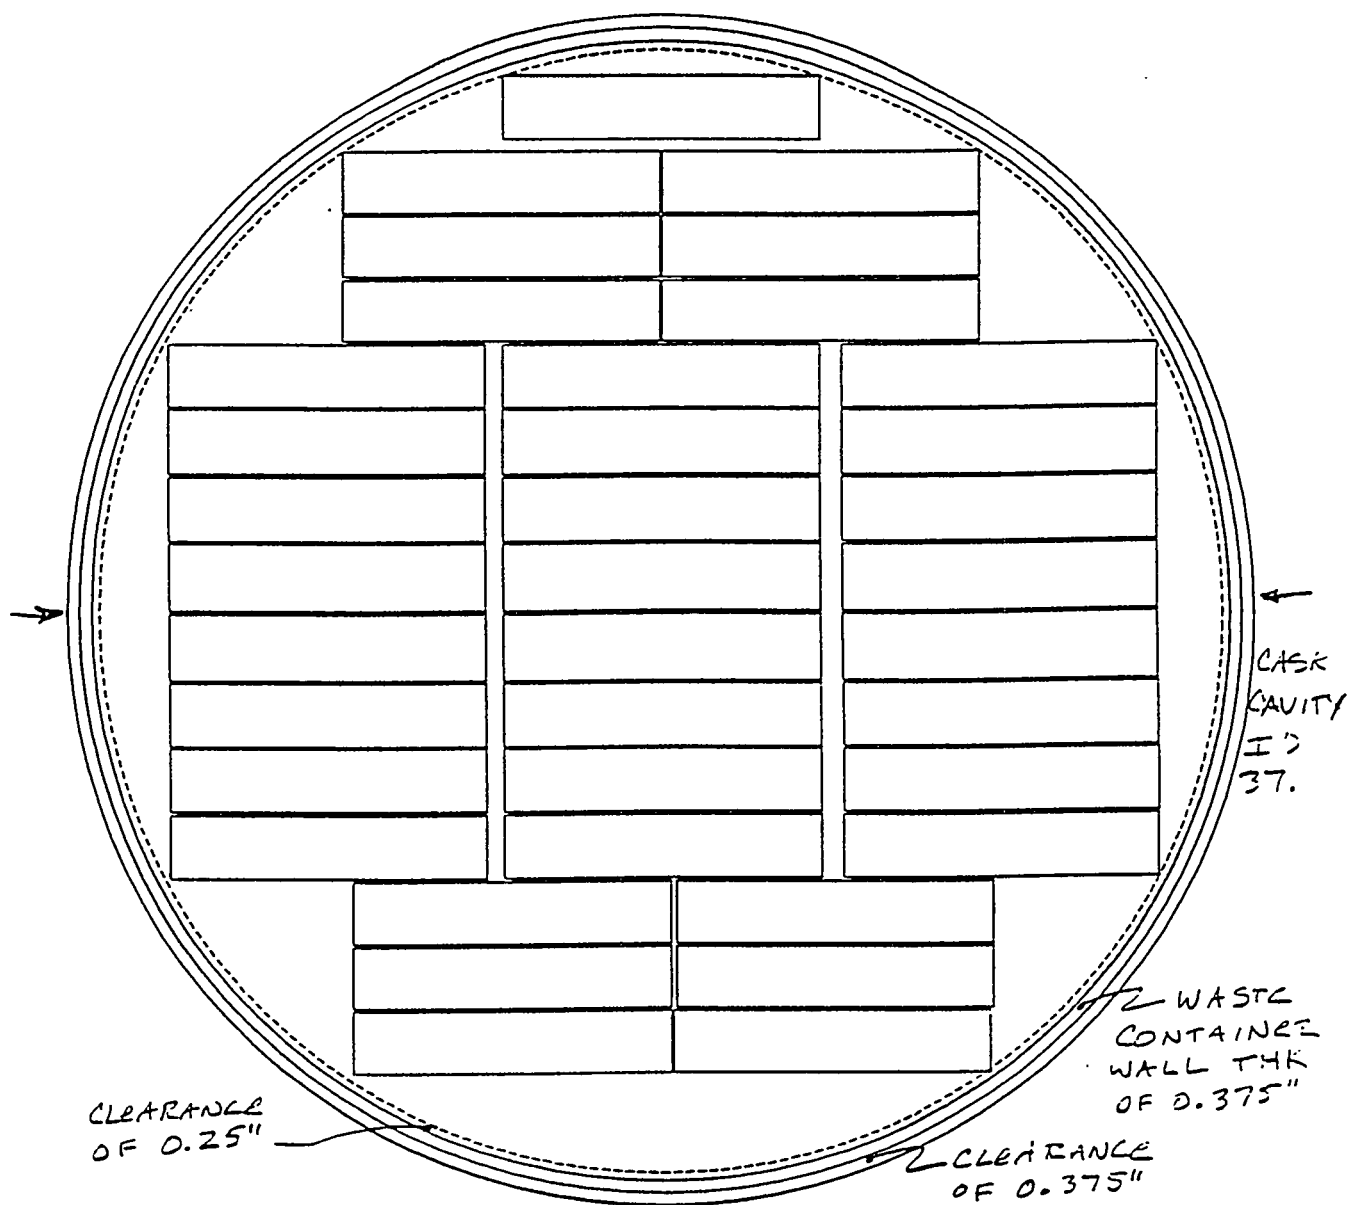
Arrangement of BWR control rod blades in a cylindrical cross section waste container.
